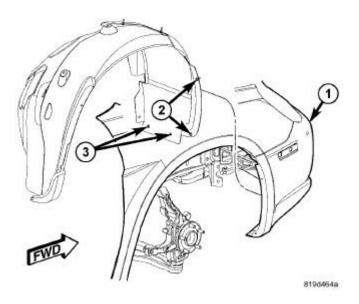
FRONT SPLASH SHIELDS Courtesy of CHRYSLER LLC
